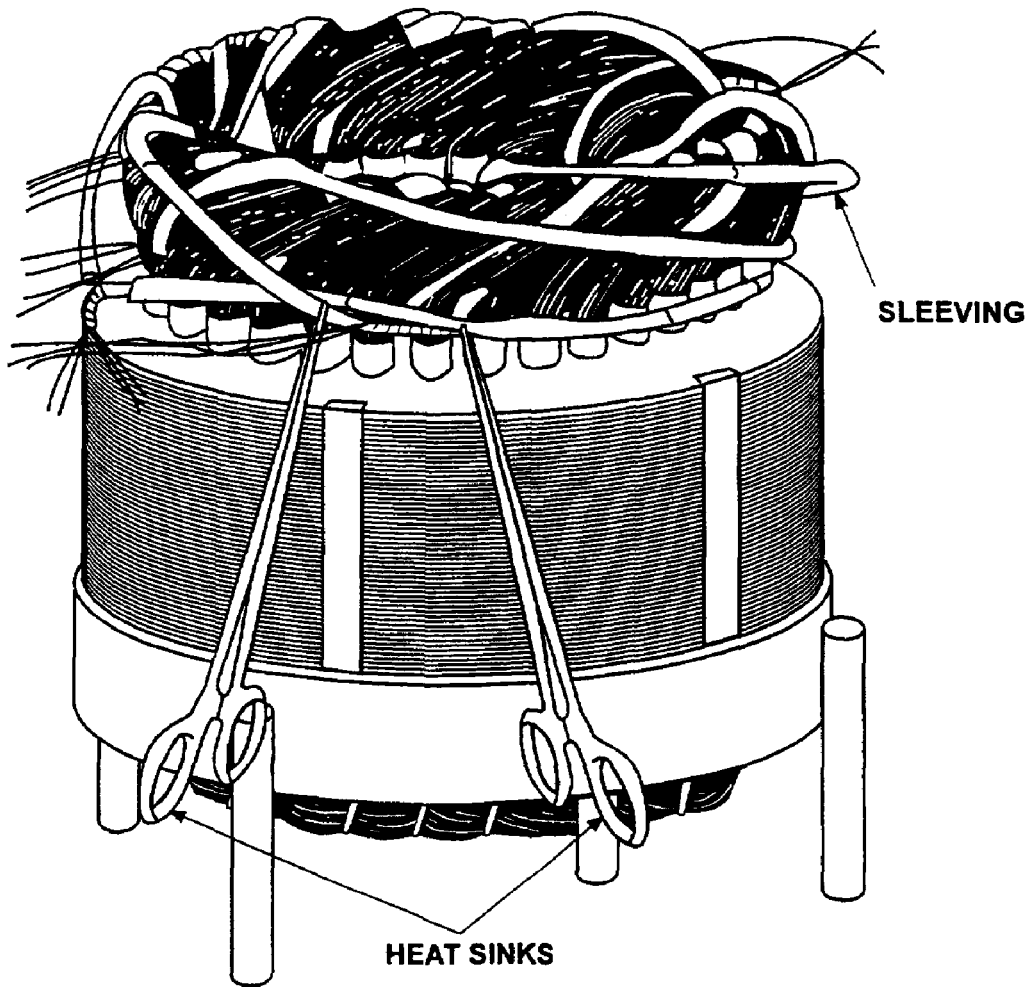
Heat Sinks in Place and Placement of Sleeving
